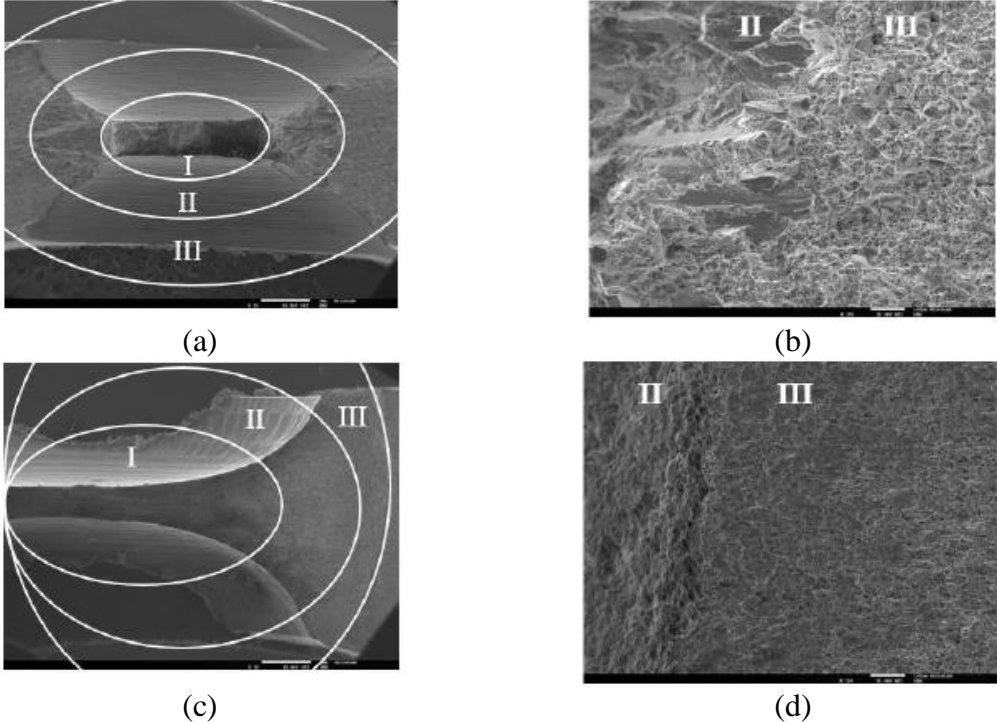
Cruciform Fracture surface with propagation stages: C-T 1 (a) and (b); T-T (c) and (d).
